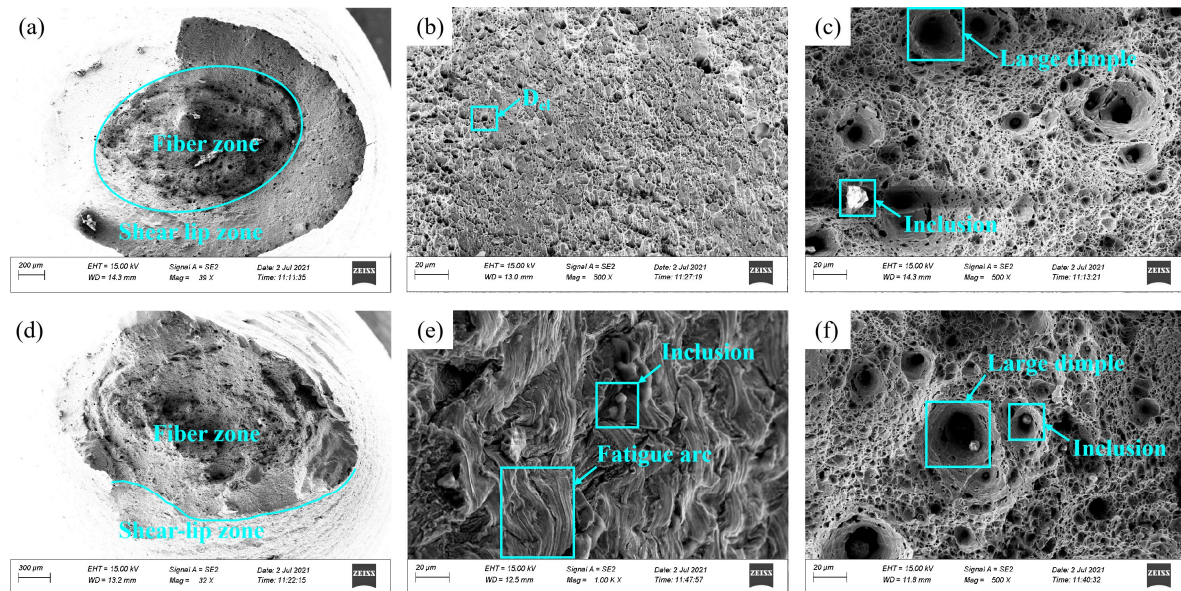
Fatigue fracture morphology of the specimen under the maximum stress of 520 MPa (a, d) Macroscopic morphology; (b, e) Shear lip zone; (c, f) Fiber zone.
